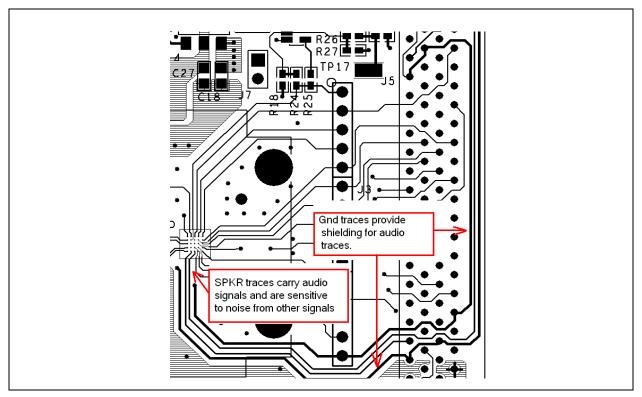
Example of Routing SPKR Traces from BGA Package
